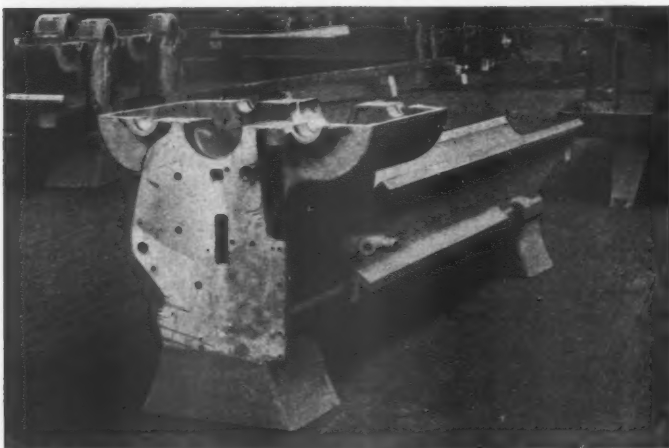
A MACHINE-TOOL CASTING OF DIFFICULT DESIGN FROM THE FOUNDRYMAN'S STANDPOINT
